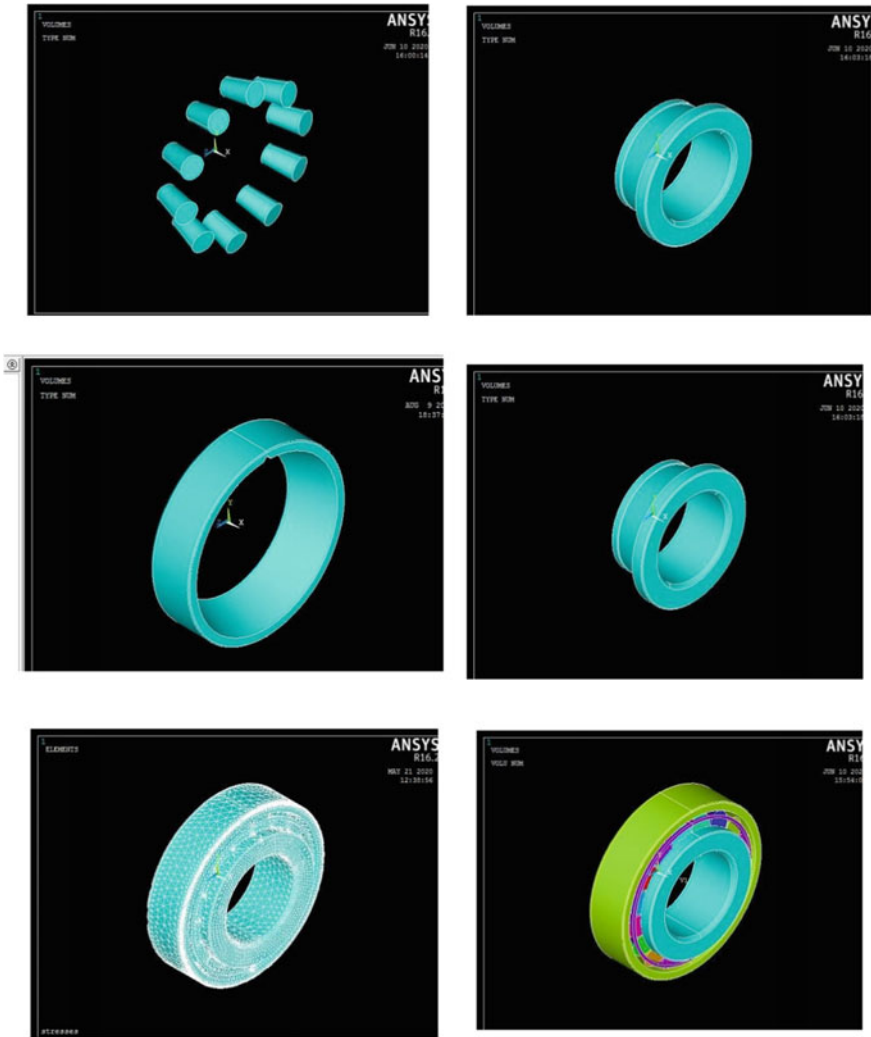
Inner race, defective outer race, cage, roller, assembled model and meshed model of taper roller
